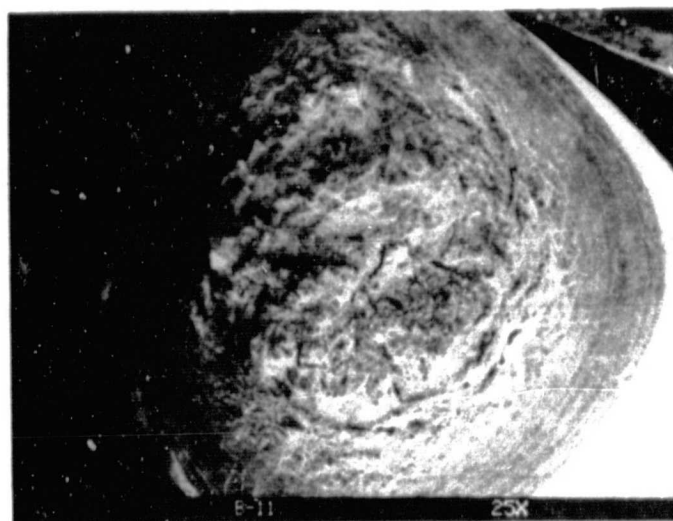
Fracture Surface of Specimen B-11, 2 1/2 Cr - 1 Mo Steel Exposed to FeTiH_x Environment.
